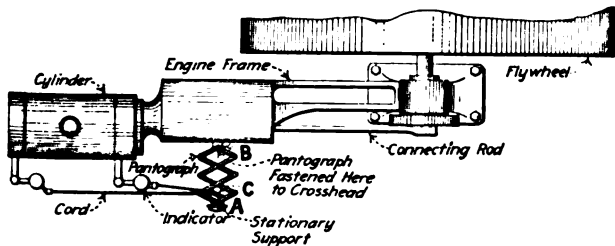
Plan view of an engine fitted with pantograph and indicators.
